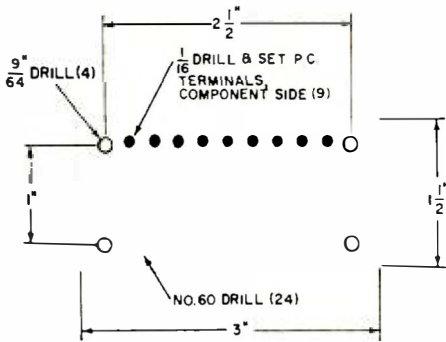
Foil side of full-size PC board (right) is drilled as shown above and components mounted as shown in Fig. 3.
